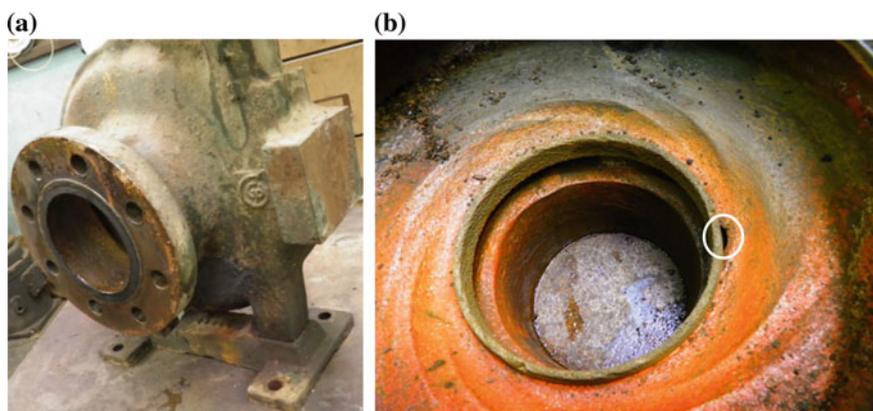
a General view of failed pump. b Corroded inner surface of centrifugal pump with large corrosion hole (marked with white circle)
